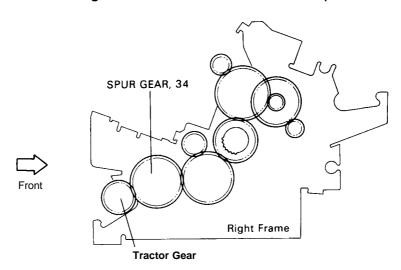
Arrangement of Gears in Front Push Tractor Feed
